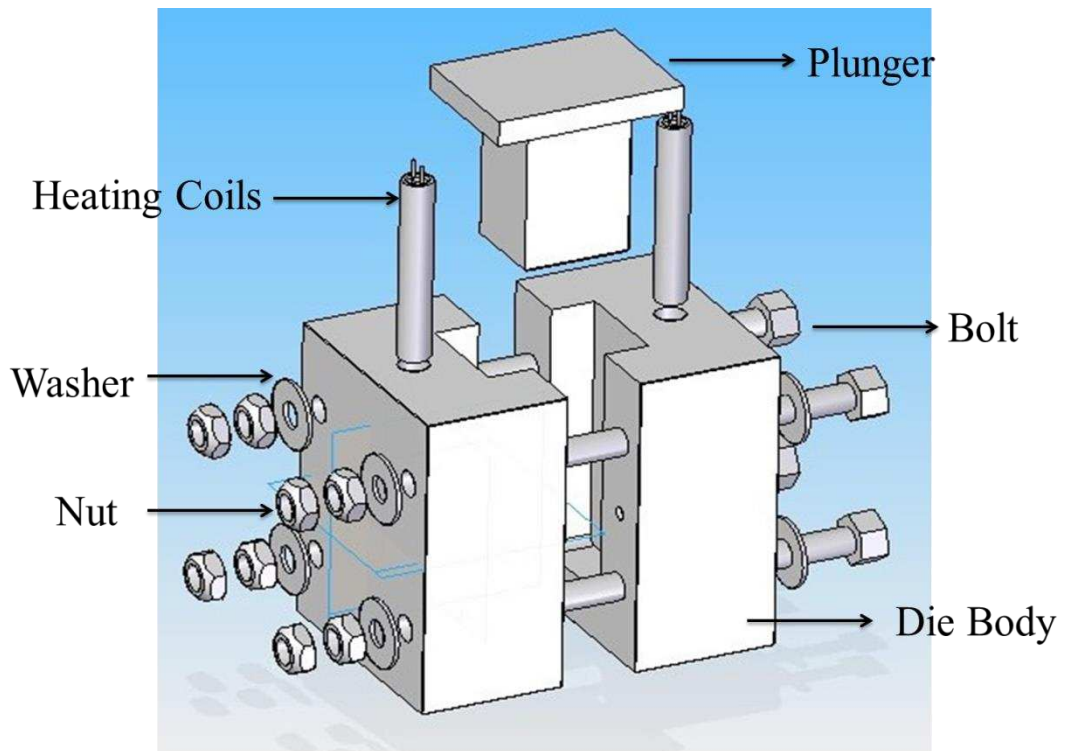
Three dimensional exploded view of the Squeeze casting split type die with plunger.
